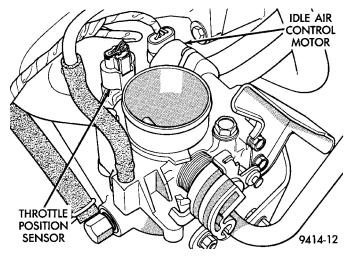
Throttle Position Sensor and Idle Air Control Motor
